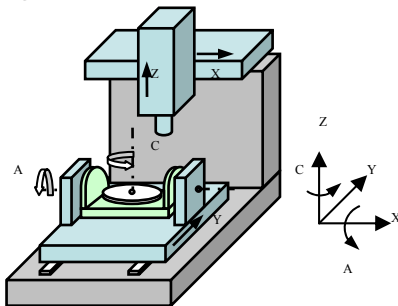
The configuration of a five-axis machine tool considered in this paper.
